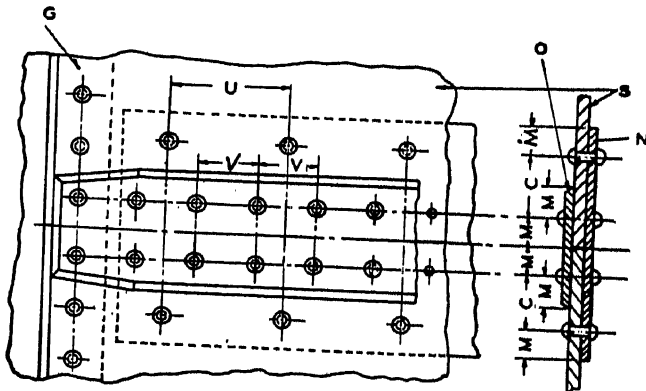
Double-riveted Butt Joint—Longitudinal.
